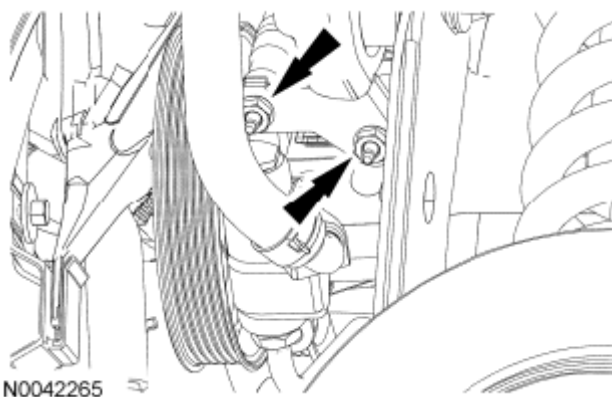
Identifying Wiring Harness Bracket And Nuts
